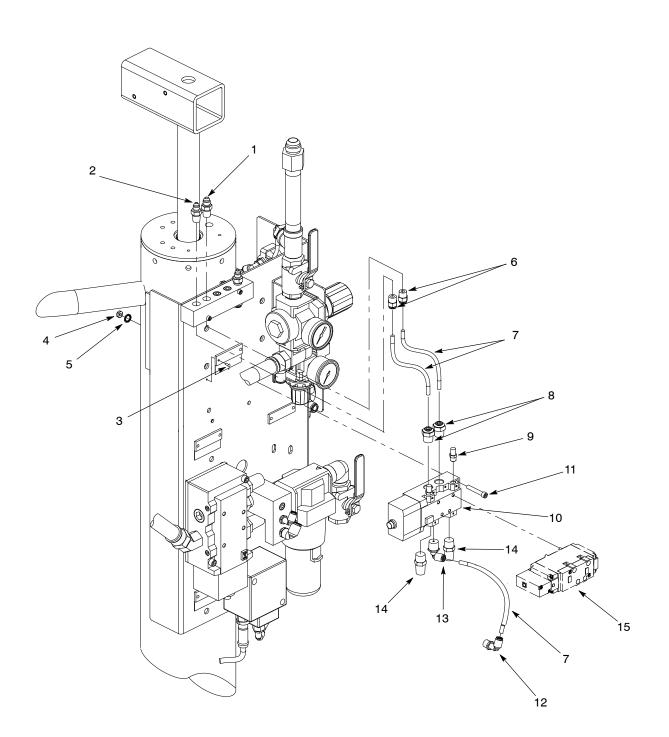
120 Vac ISO 5592/2 Size 1 Valve Base without DeviceNet I/O Cable
